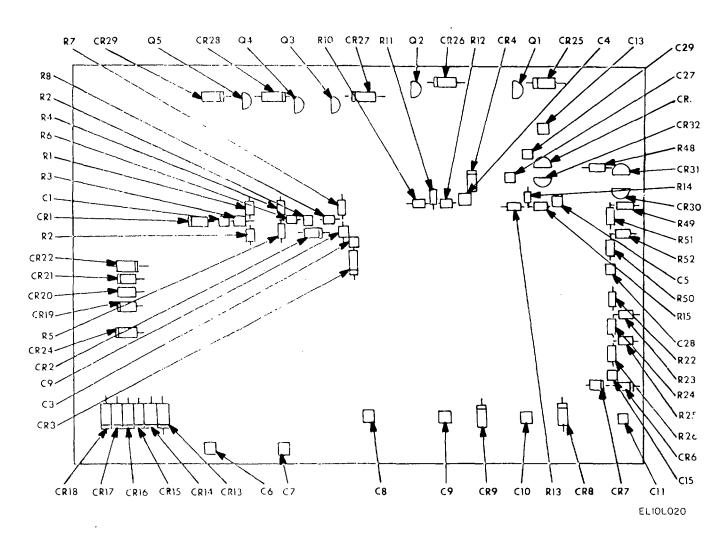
(2). Rf divider board A8A1, parts location (Sheet 2 of 2)
